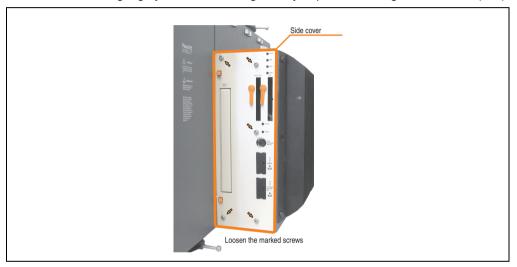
Example - Side cover removal on the system unit 5PC720.1505-02
